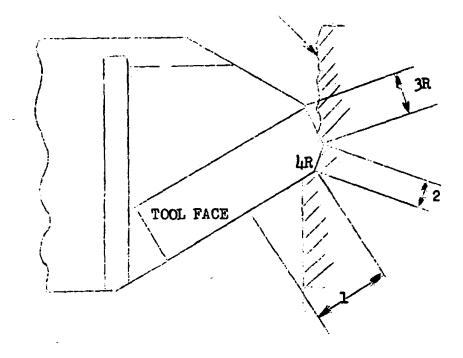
(ROUGH BORING TOOL BIT) IN CUTTING POSITION
